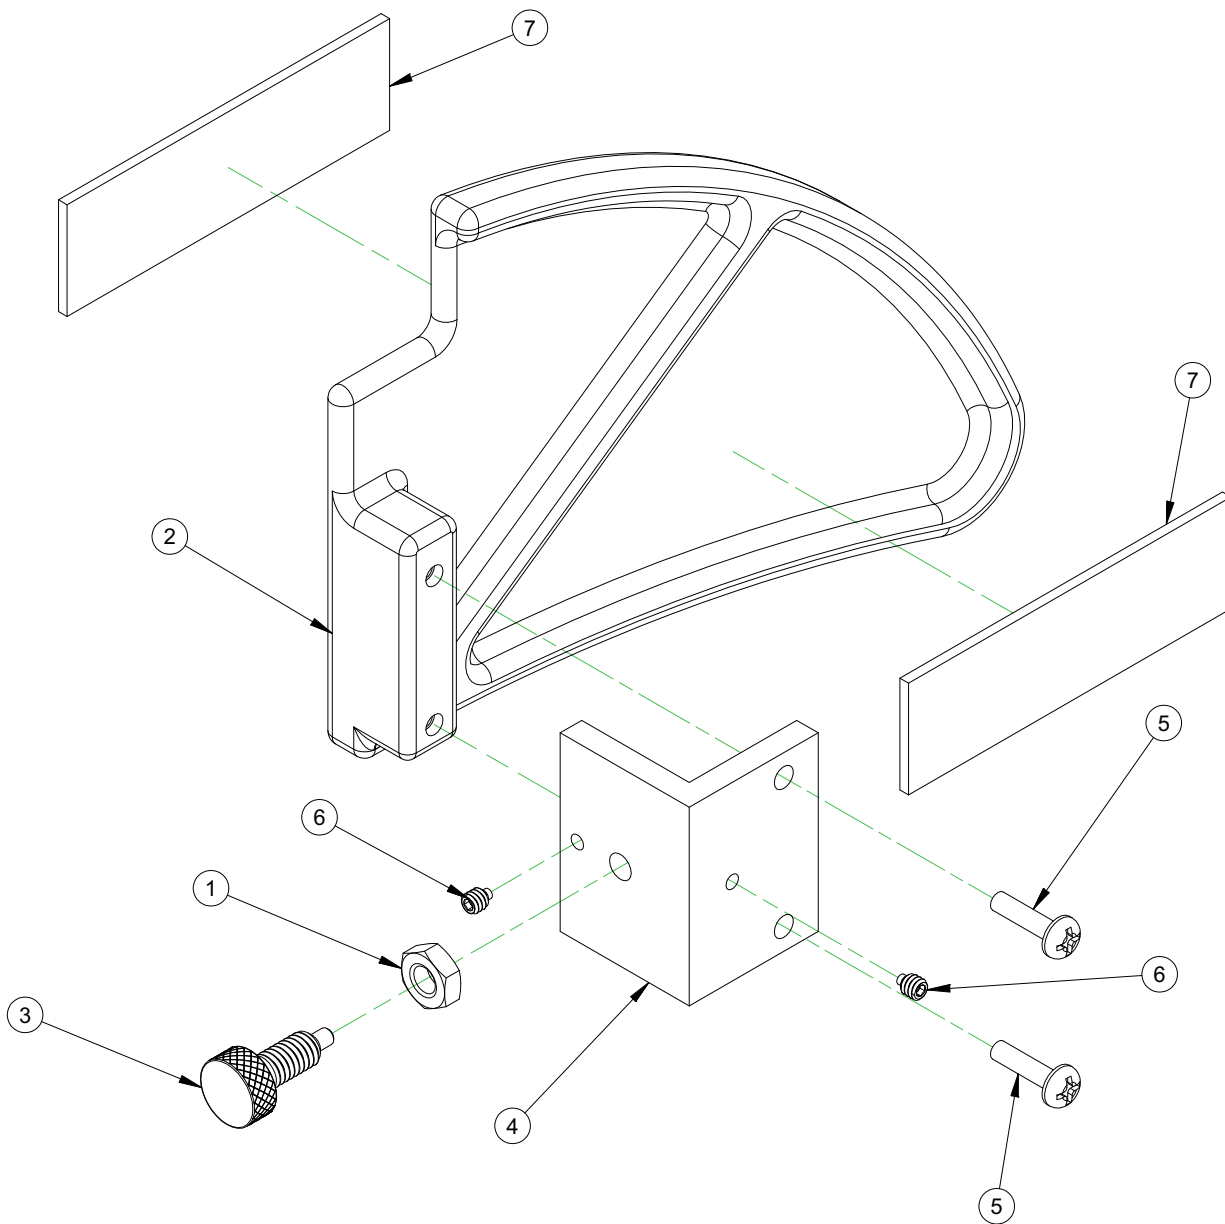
CARBIDE INSERTS AND HOLDERS ASSEMBLY
